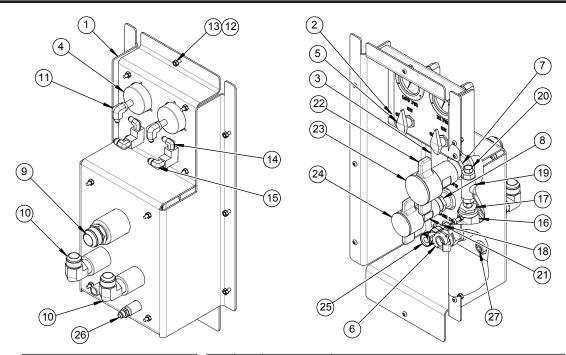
DPU444-03 Diesel Power Unit Assembly
